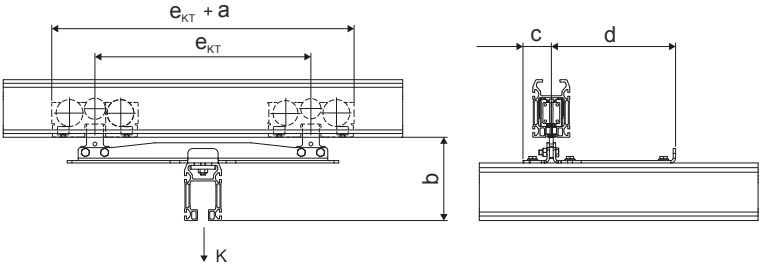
A12/A16 single girder crane end carriage, A12/A16 track section
